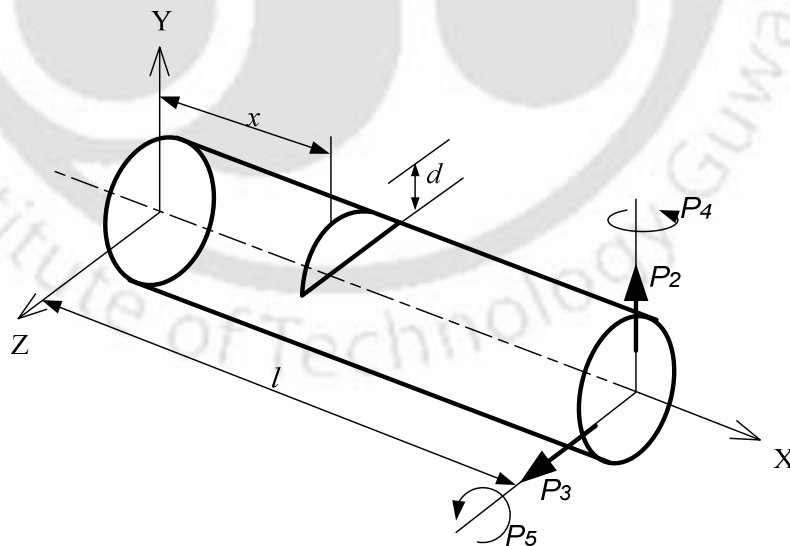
A shaft element with a crack subjected to a transverse loading.
